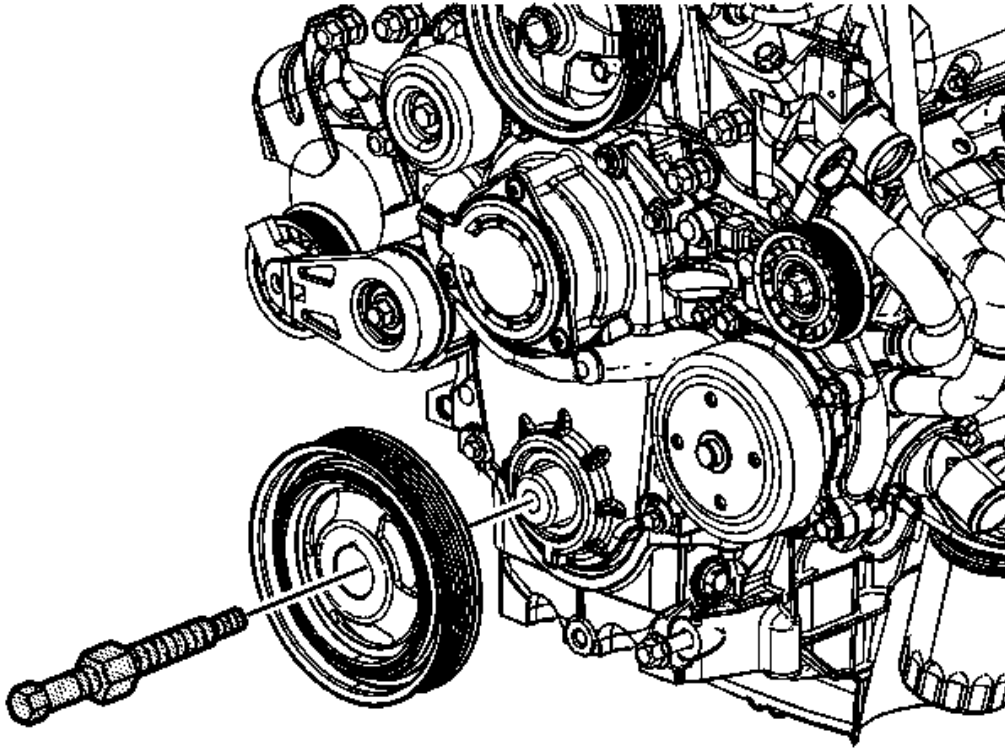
View Of Balancer & Crank Sprocket Puller (J 29113)
